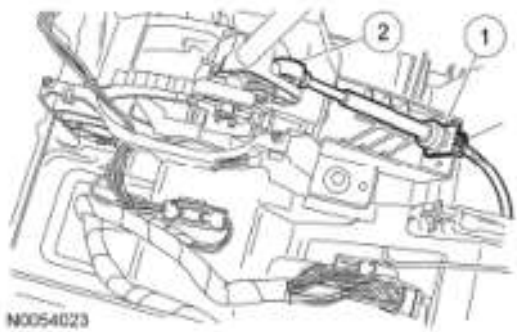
Locating Plastic Starter Motor Electrical Connector Cap
